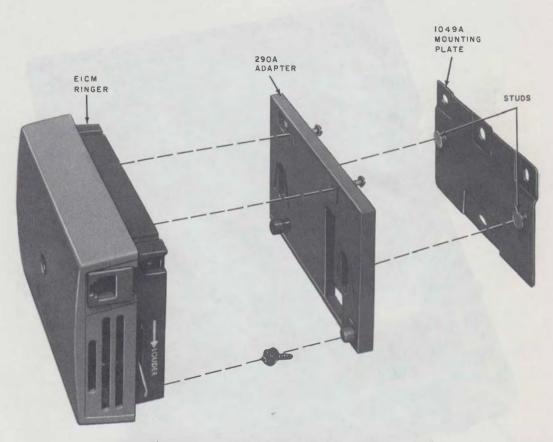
PEICM Ringer, 290A Adapter, and 1049A Mounting Plate®
